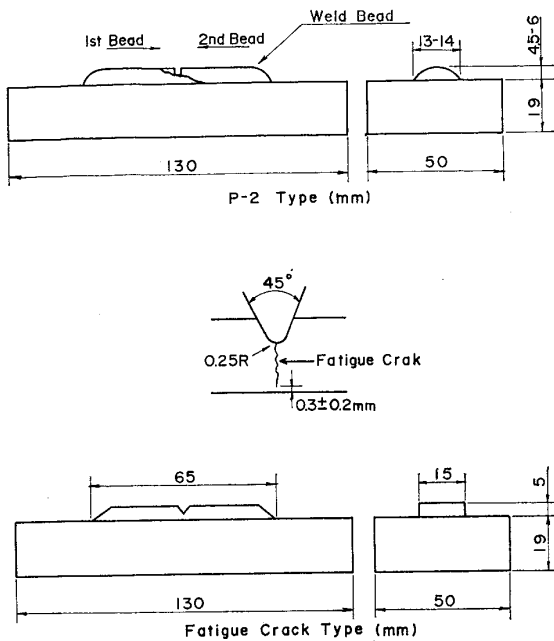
Dimensions of P-2 and fatigue crack type drop weight specimen.
